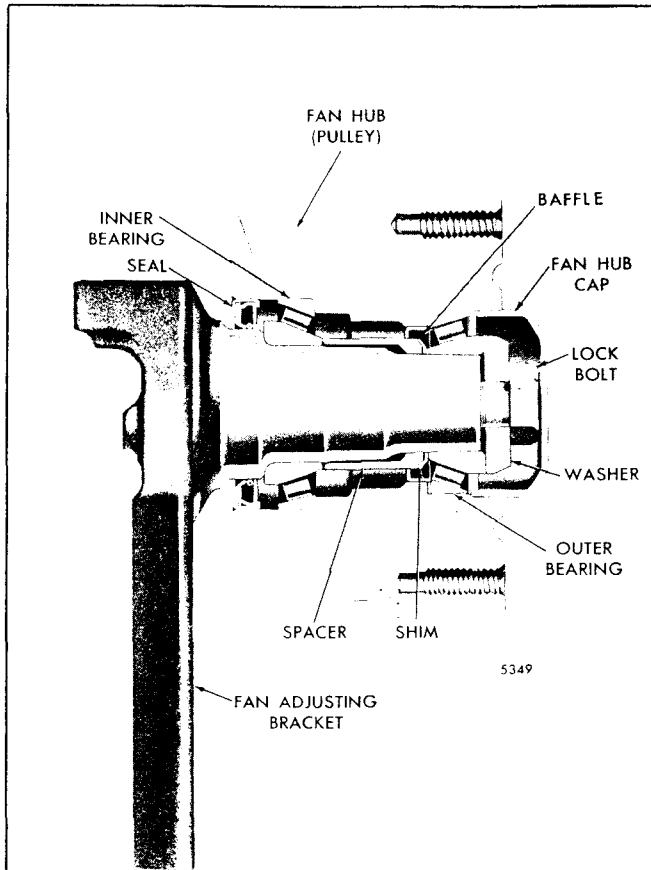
Current Fan Hub Assembly (In-Line Engine)
